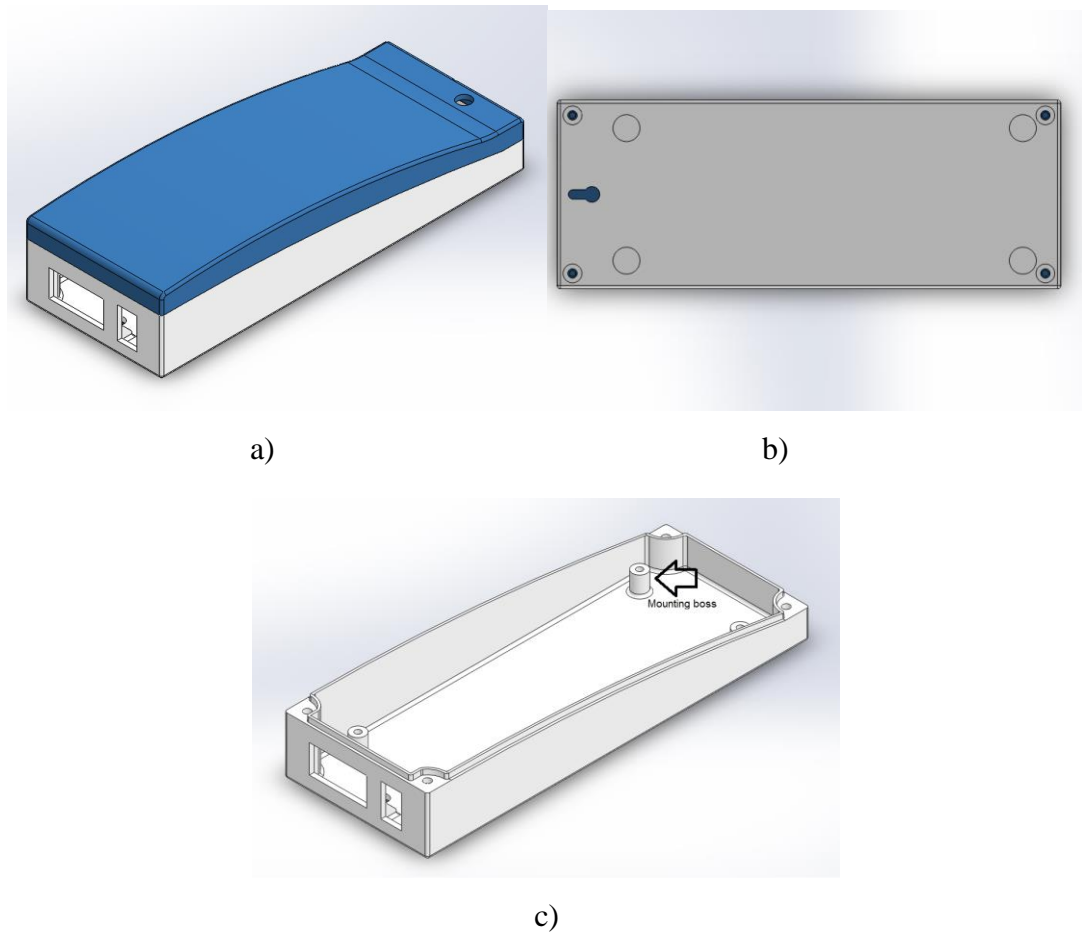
First model. a – top and bottom part, b – model bottom, c- mounting boss
